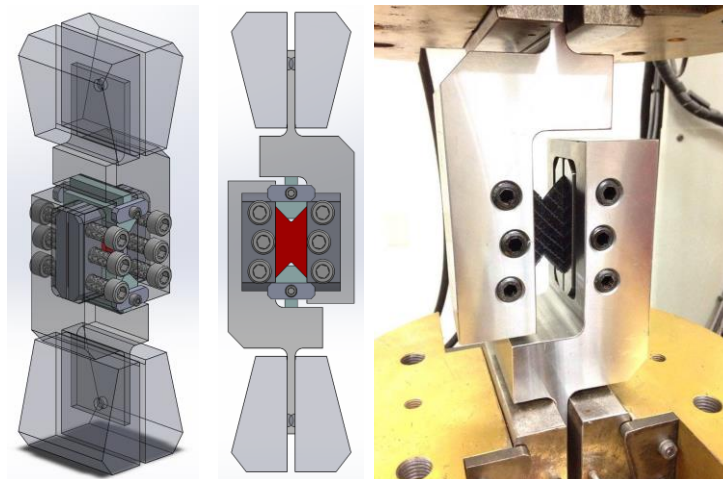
CAD Model and Finished Fixture holding a specimen
